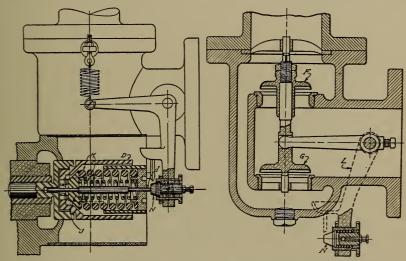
Details of De Laval Governor and Automatic Safety Vacuum Valve
